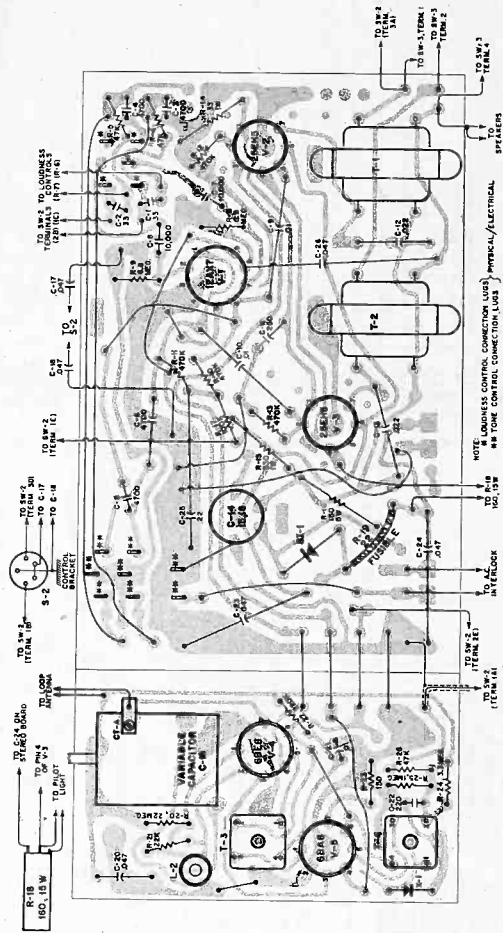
PRINTED CIRCUIT CHASSIS 120455B
